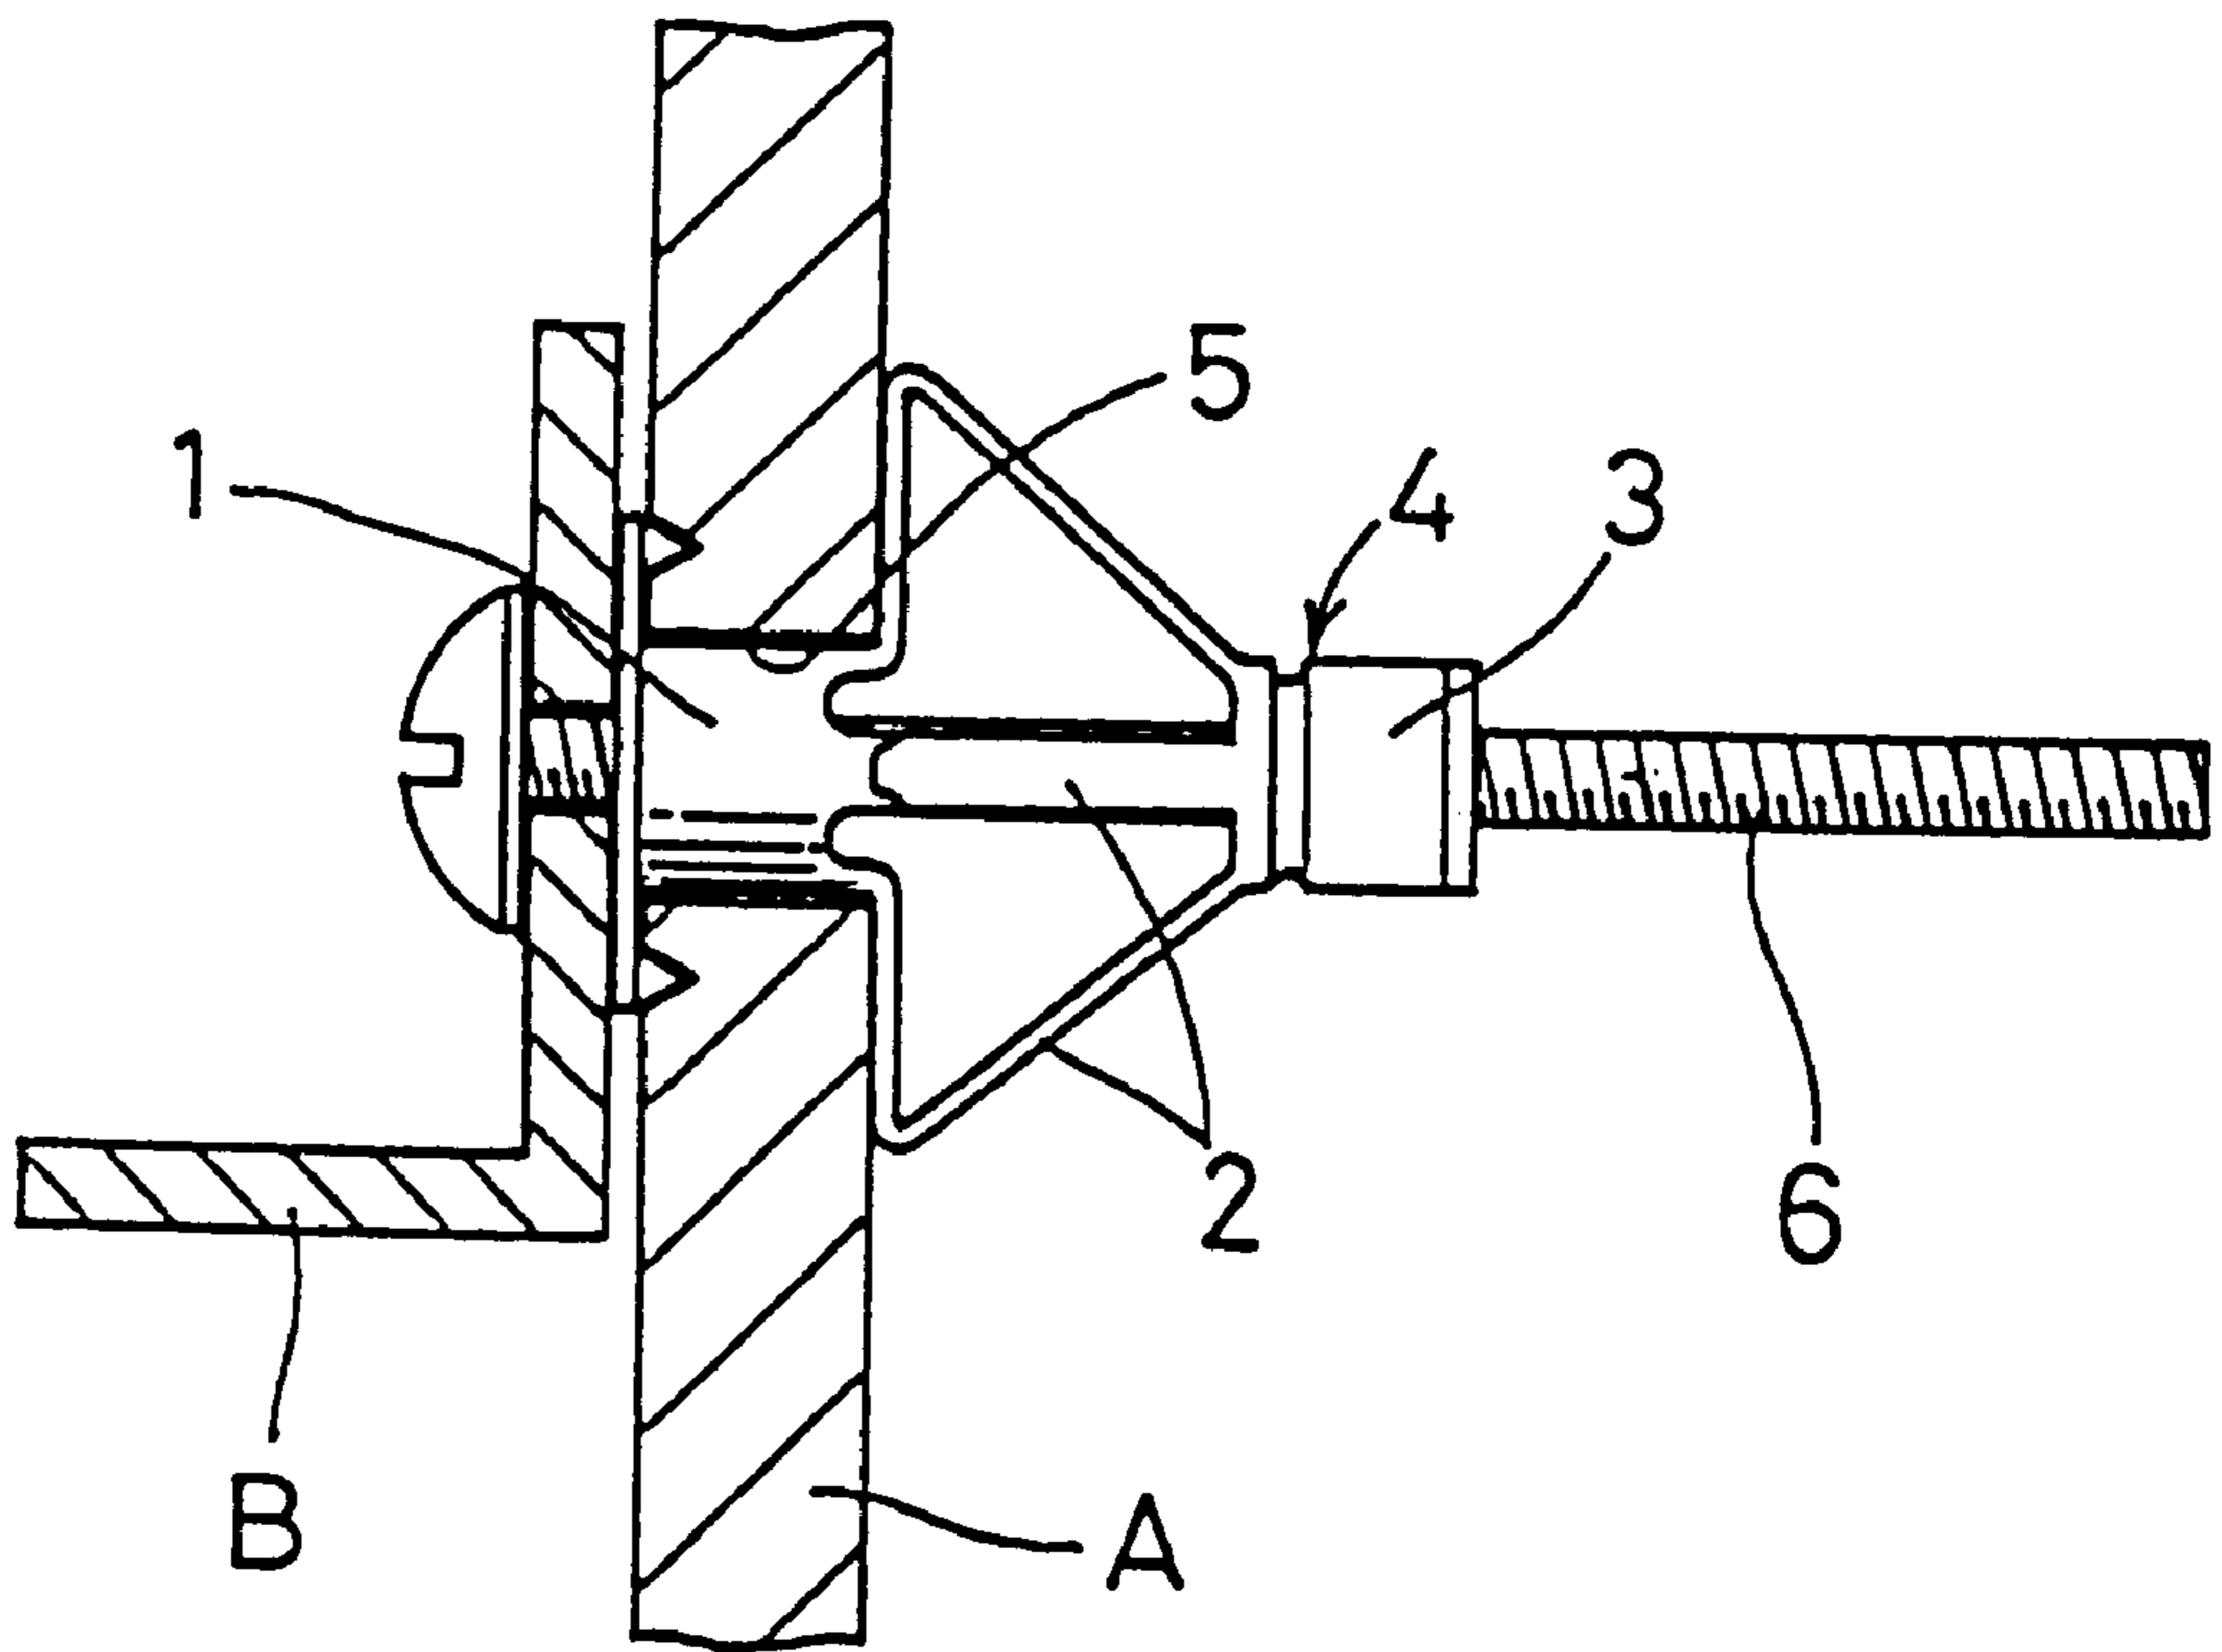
PLATE-SHAPED FASTENER AND DRIVING JIG FOR THE SAME
